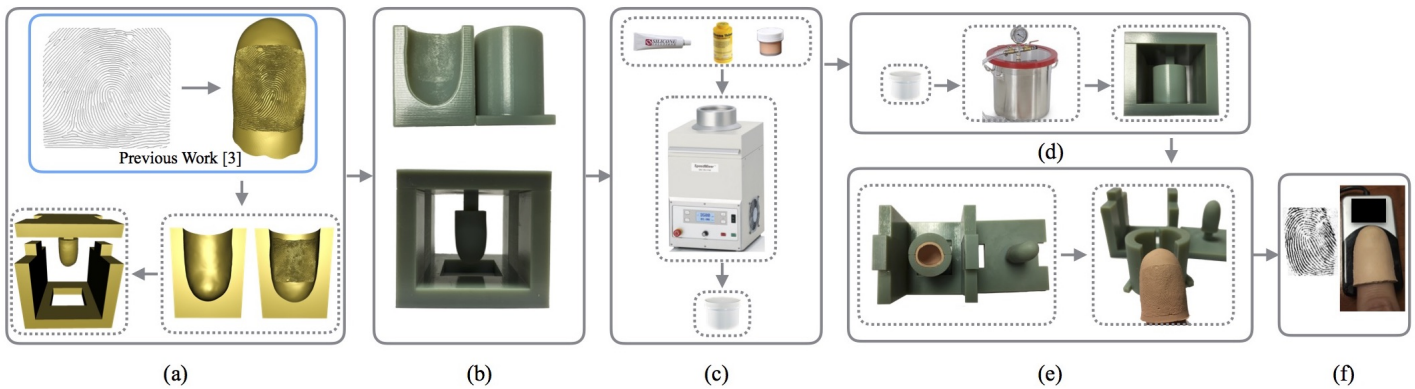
System block diagram of the proposed molding and casting process for making 3D targets. (a) A 3D negative mold (of a 2D fingerprint image) and a supporting scaffolding system (necessary for making the fingerprint target wearable) are electronically fabricated; (b) 3D electronic models are manufactured by 3D printing and chemical cleaning; (c) conductive silicone, silicone thinner, and human colored dye are mechanically mixed to produce a casting material with similar conductive, mechanical, and optical properties to the human skin; (d) the material fabricated in (c) is cast into the mold and scaffolding system; (d) vacuum degassing ensures that air bubbles are removed from the casted material; (e) wearable fingerprint targets are extracted 72 hours after pouring the casting material; (f) the wearable, 3D fingerprint target is used for fingerprint reader evaluations.
